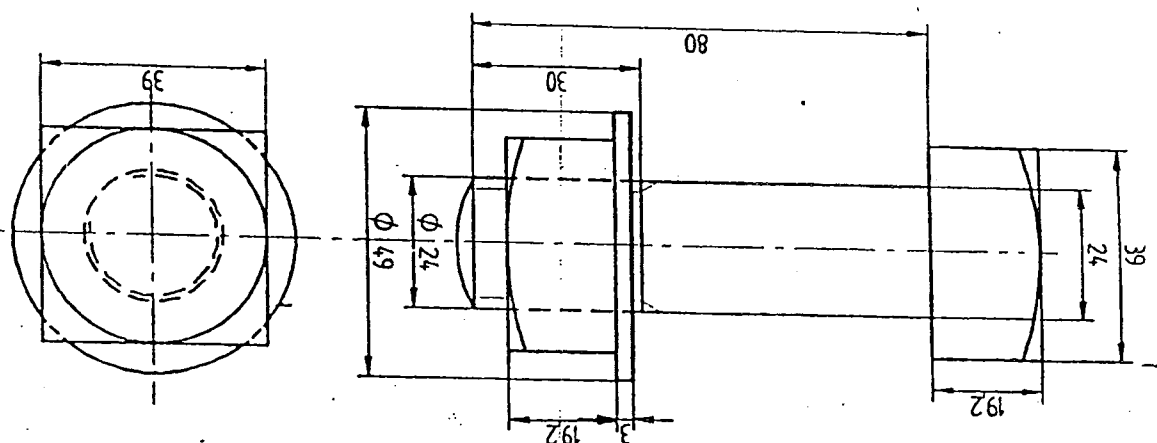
Drawing Views of Square Bolt Head and Nut
